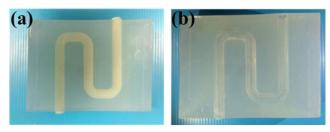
Silicone rubber molds a before and b after removing a cooling channel by using the flushing with acetone liquid
